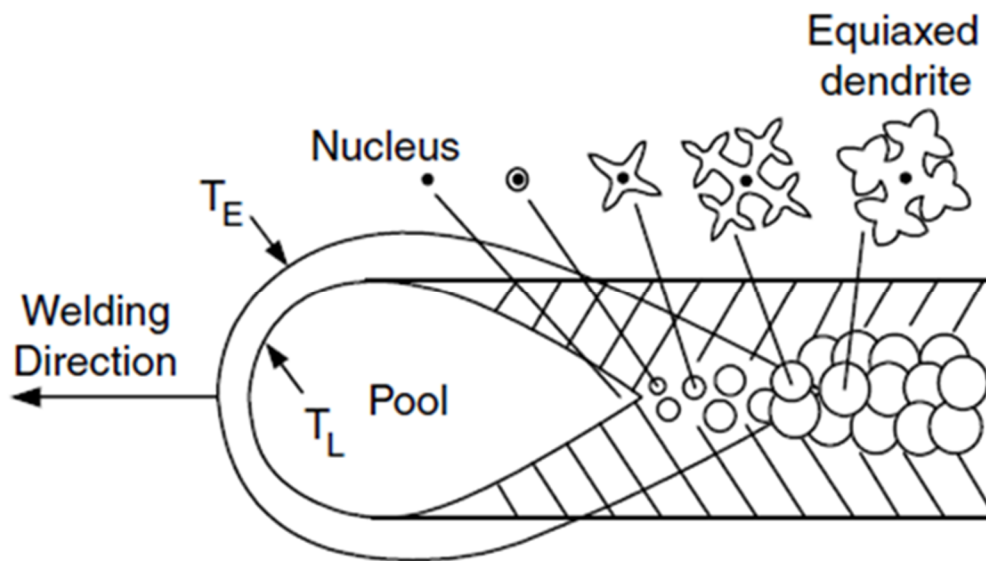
Solidification of weld pool in high speed welds [8]
